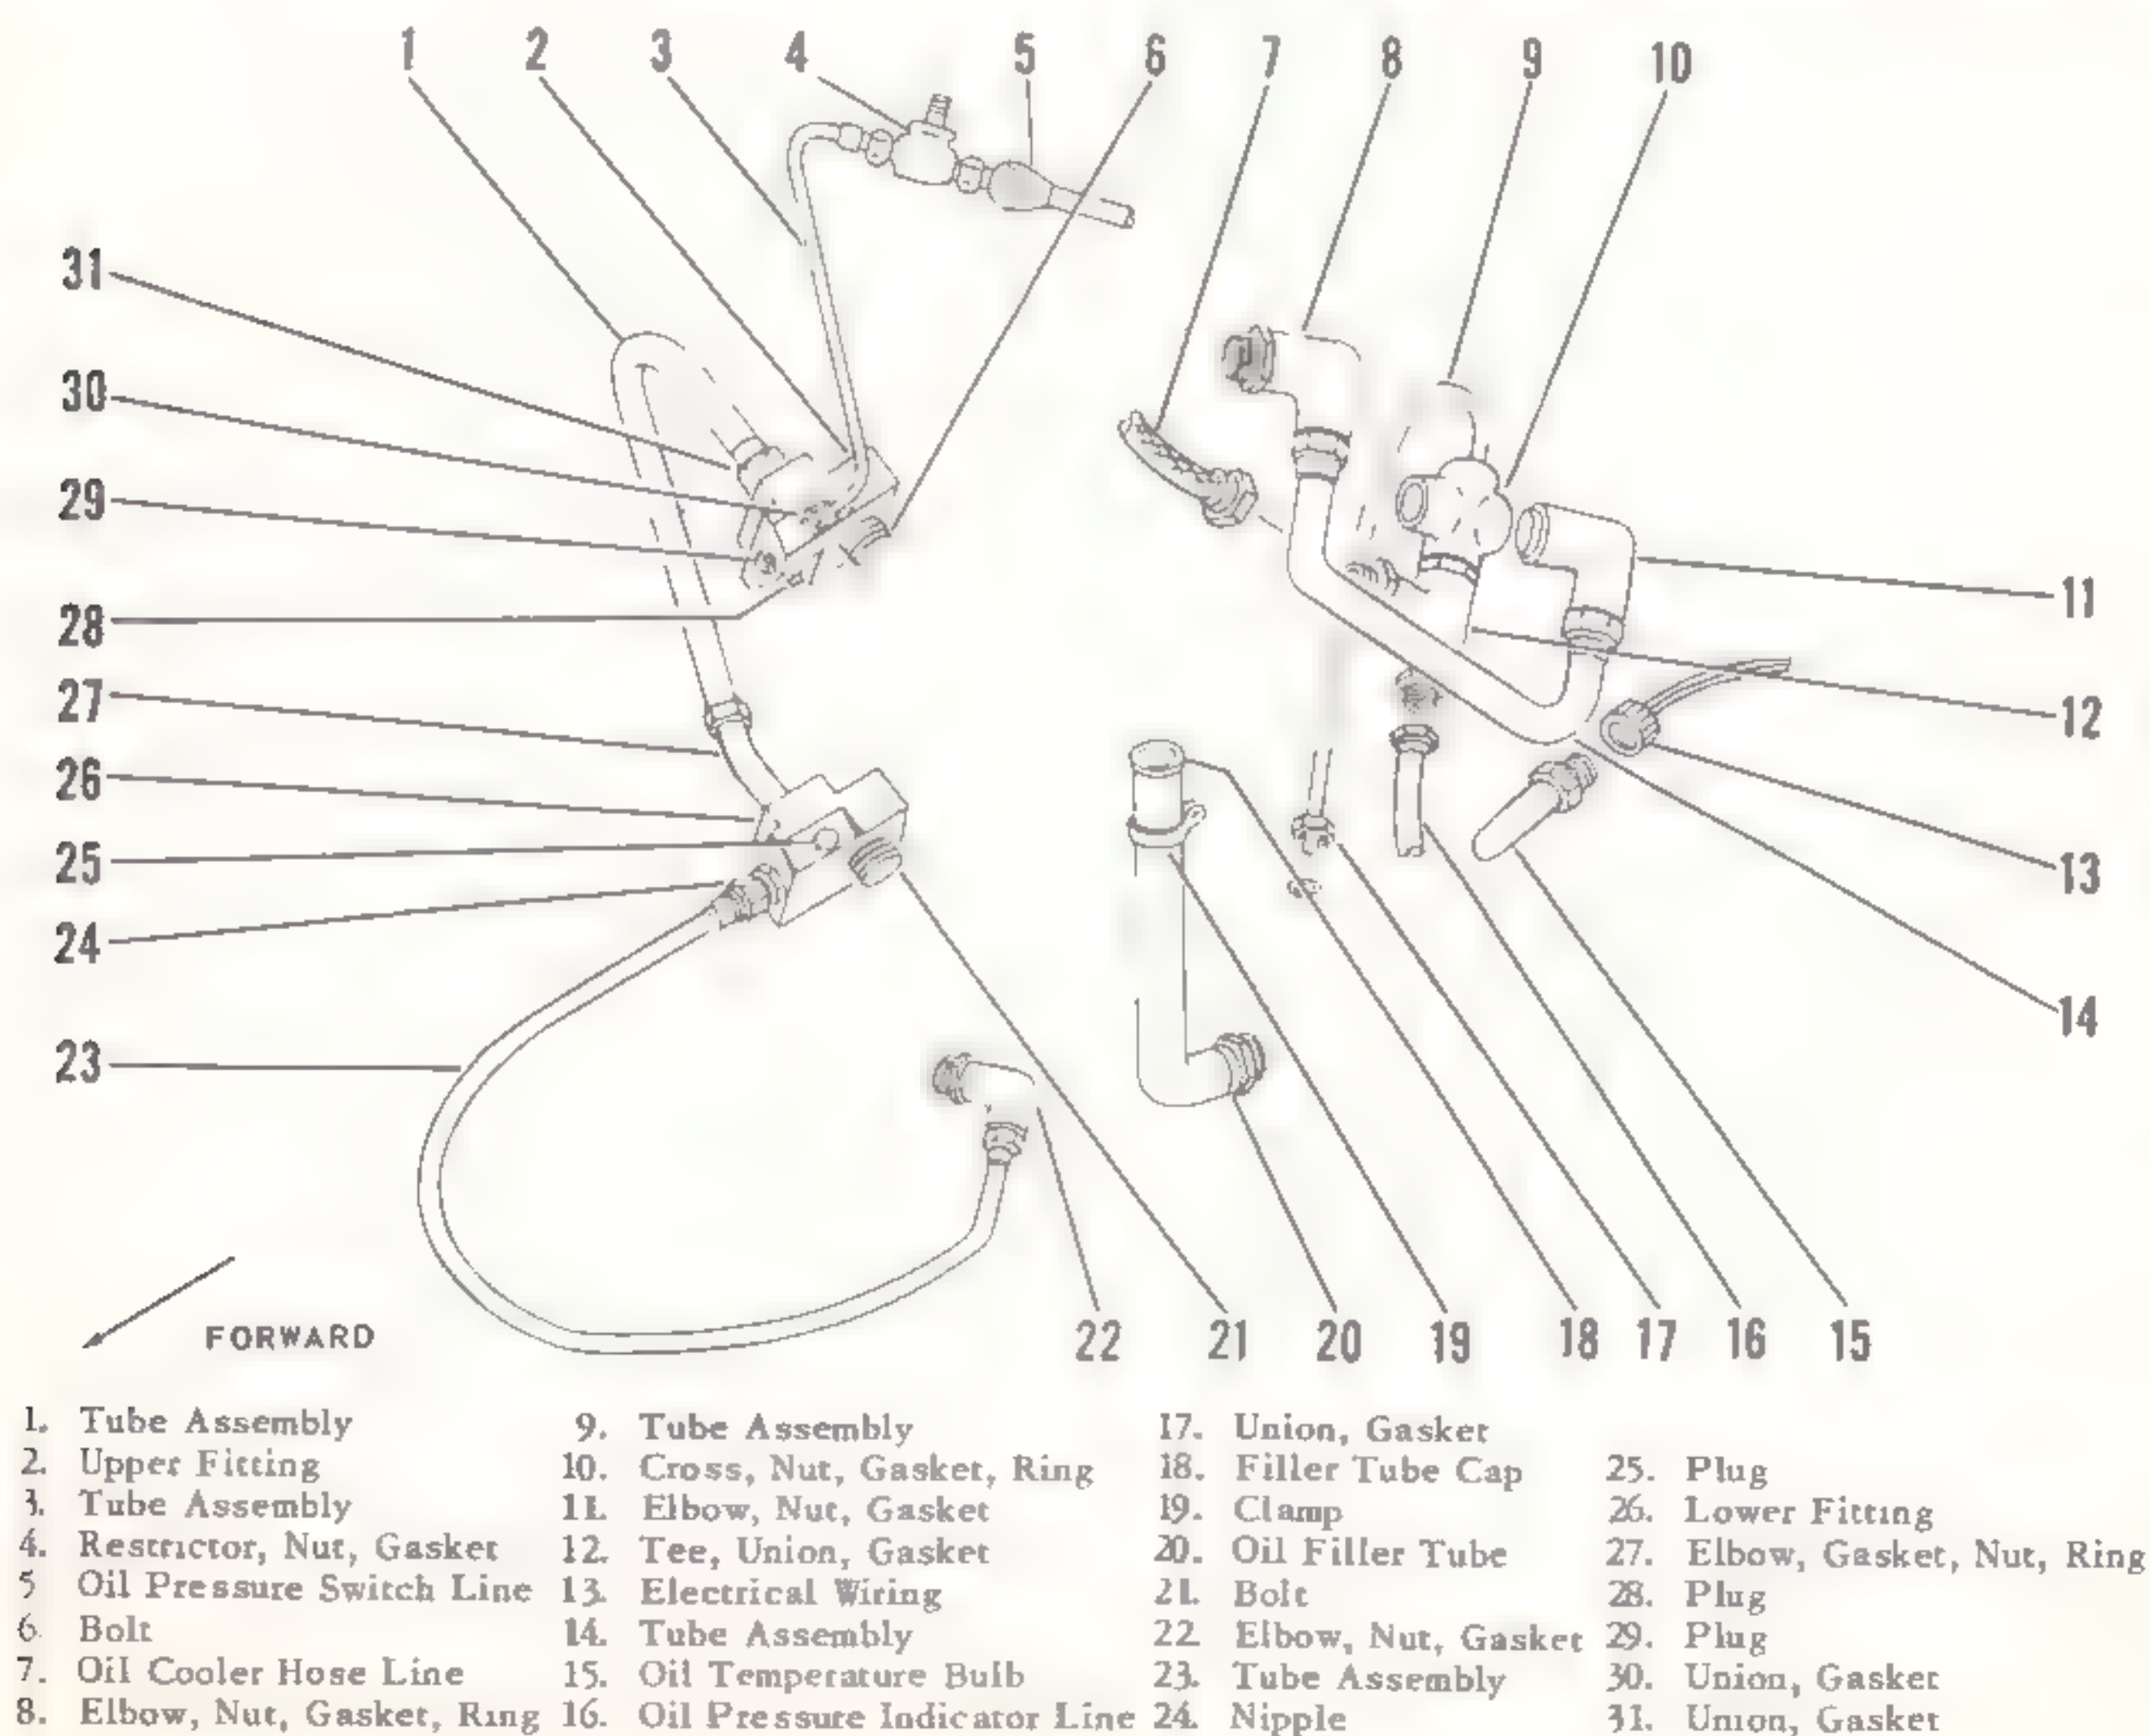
Main transmission oil separator installation (helicopters serial No. prior to 54-2882)
